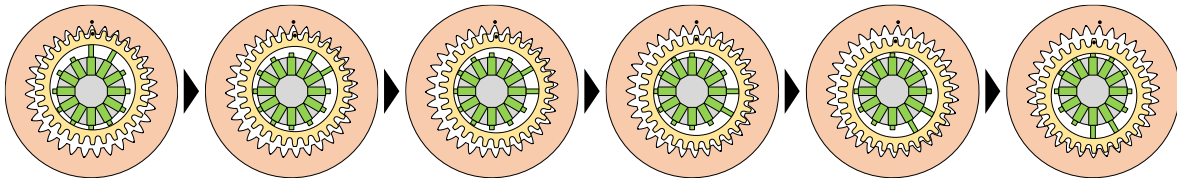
Rotation of the internal A gear by the revolution of the external gear
